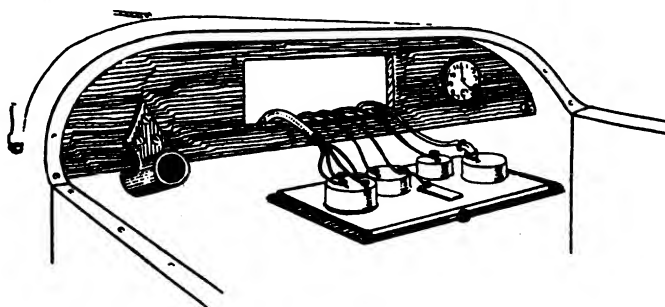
THE USING OF SLIGHTLY LONGER WIRES FOR THE INSTRUMENTS SO THAT THE WHOLE ASSEMBLY CAN BE WITHDRAWN AND WORKED UPON WOULD PROVE ADVANTAGEOUS
